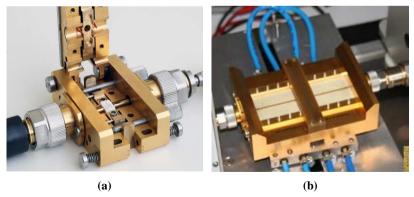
(a) "Robotron" fixture and (b) "ICM" fixture.
